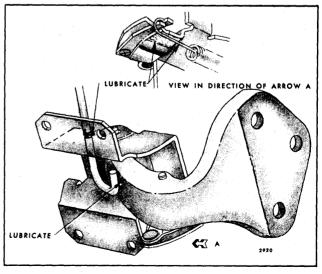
"E" Body Front Door Hinge Lubrication
